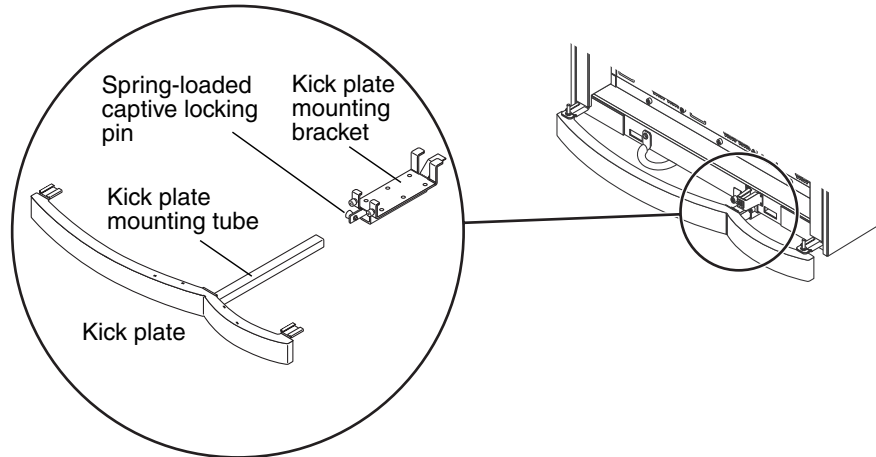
Cabinet Kick Plate Assembly Removal
